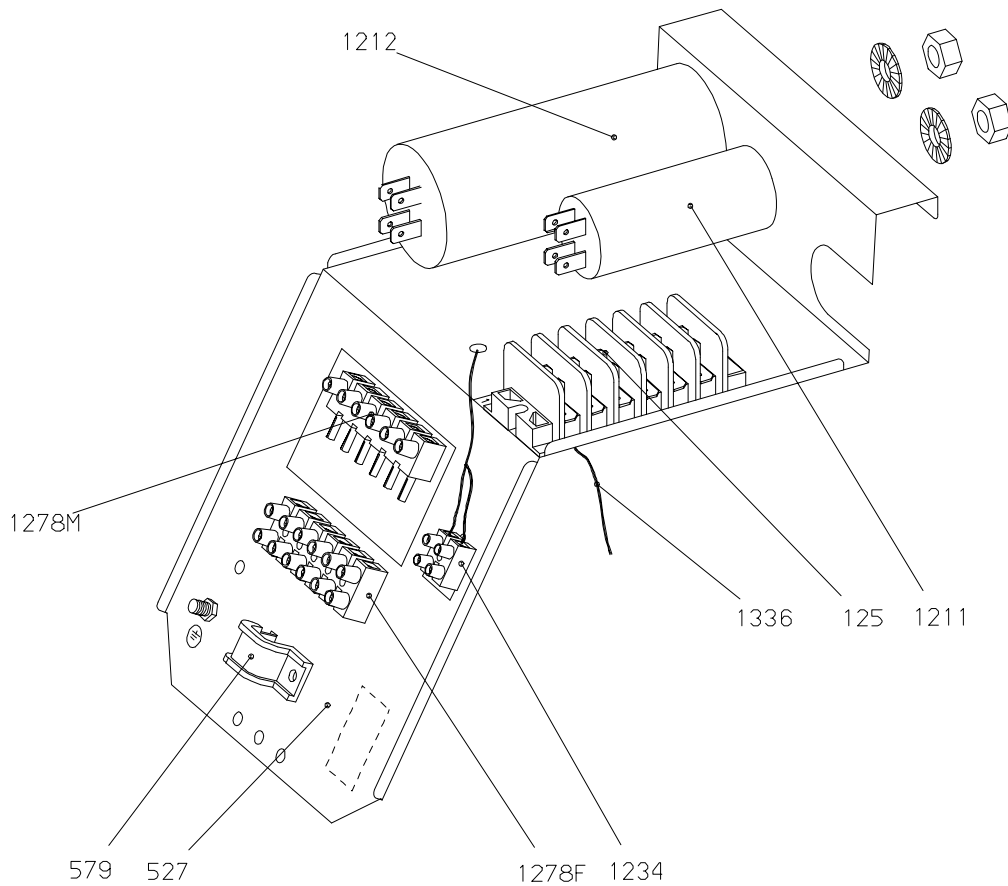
ELECTRICAL ASSEMBLY - CUE-15,20,30,40
